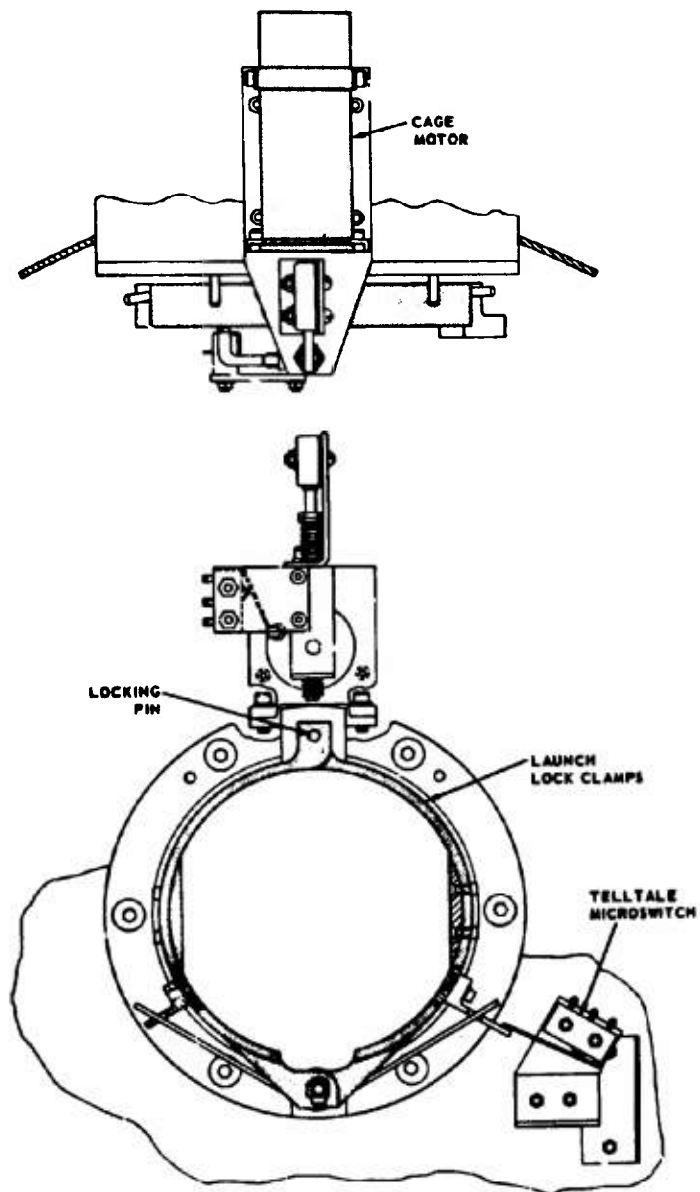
LAUNCH LOCK CLAMPING SYSTEM
